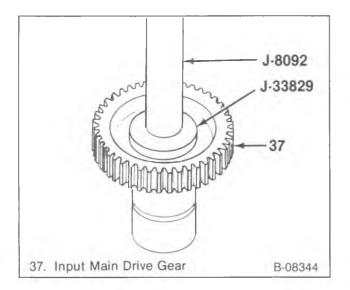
Input Main Drive Gear Pilot Bearing Installation
